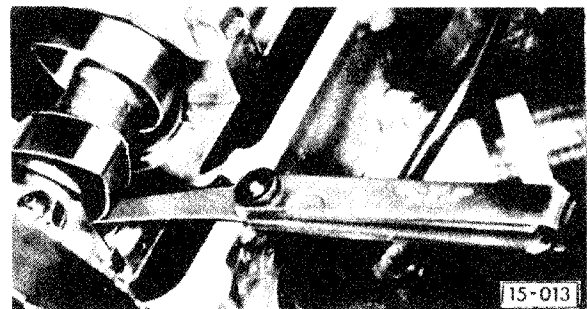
Valve clearance being measured. Both valves are closed. Both cam lobes are pointing up, away from cam followers. Feeler gauge is inserted between cam lobe and adjusting disc on top of cam follower.
